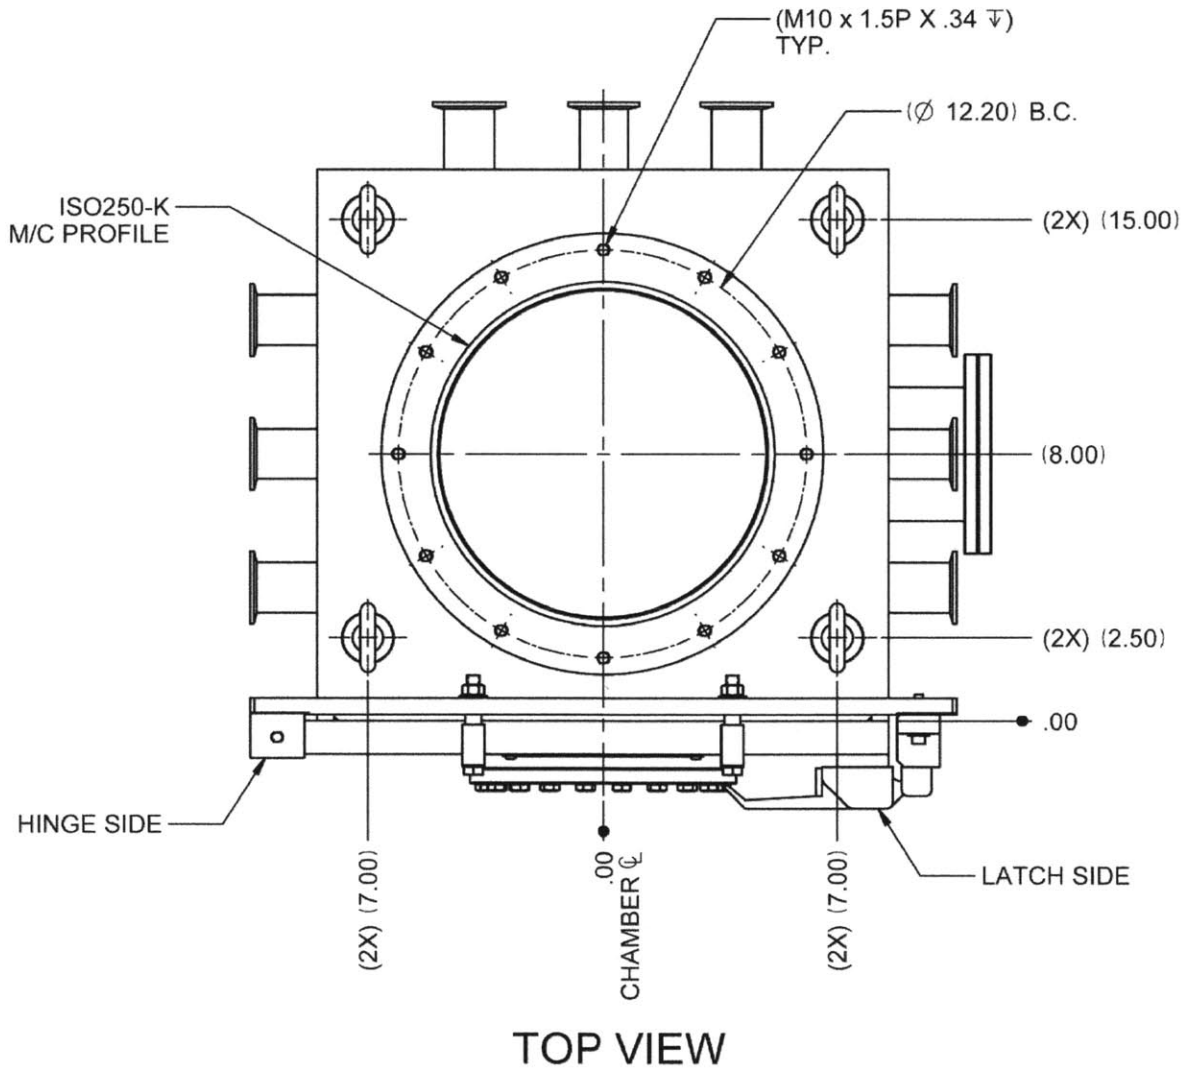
oCVD reactor chamber engineering drawing—top view. Dimensions in inches.
